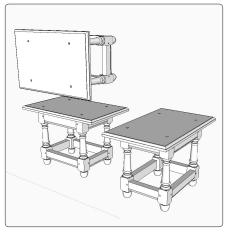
To make an orthographic drawing, rotate copies of the assembled piece for front, top, and side views.
